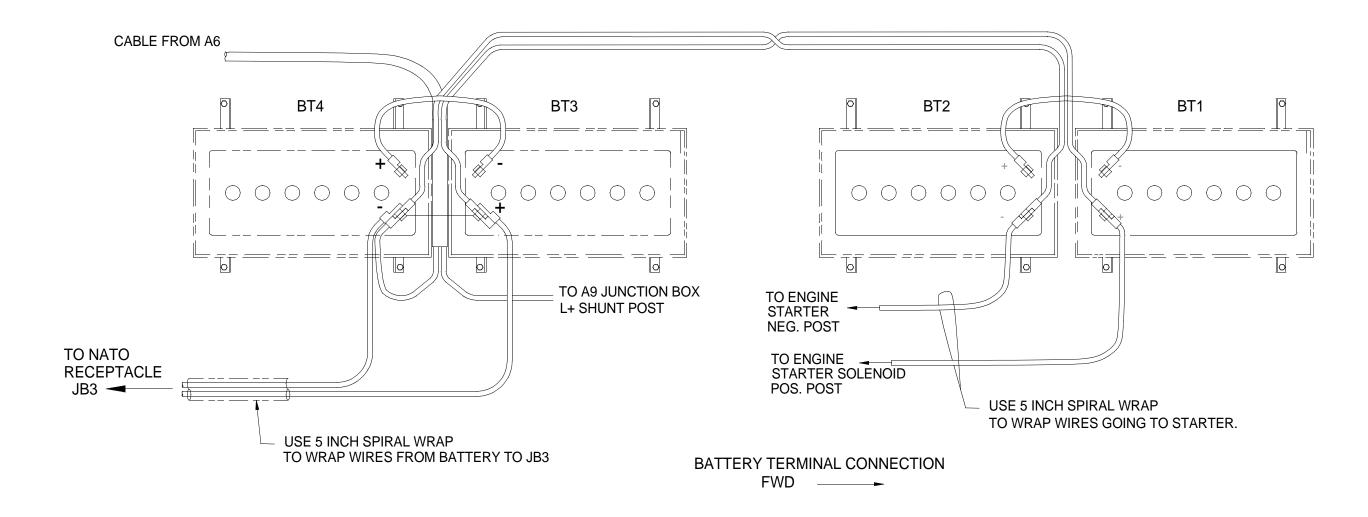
MCS Propulsion Module Electrical Assembly Wiring Diagram (Sheet 3).
